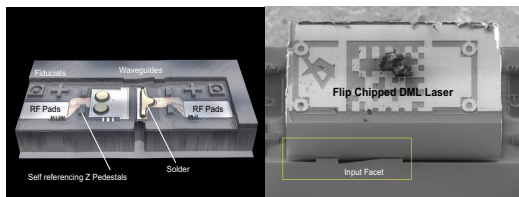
Optical Interposer chip prior to (left) and post (right) assembly
